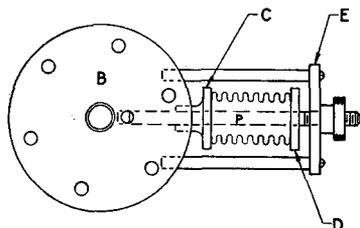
Plan showing details of the syphon assembly. *P* is soldered to *D* but slides freely through *B*, *C*, and *E*.
